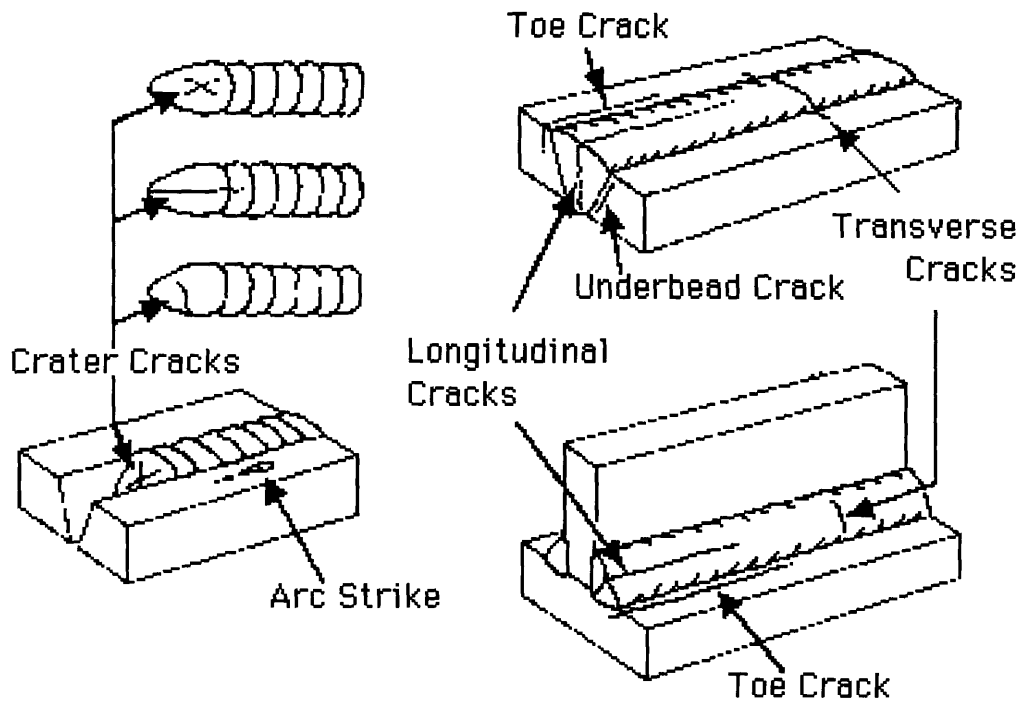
Cracks in welded joints [Ref. 1]
